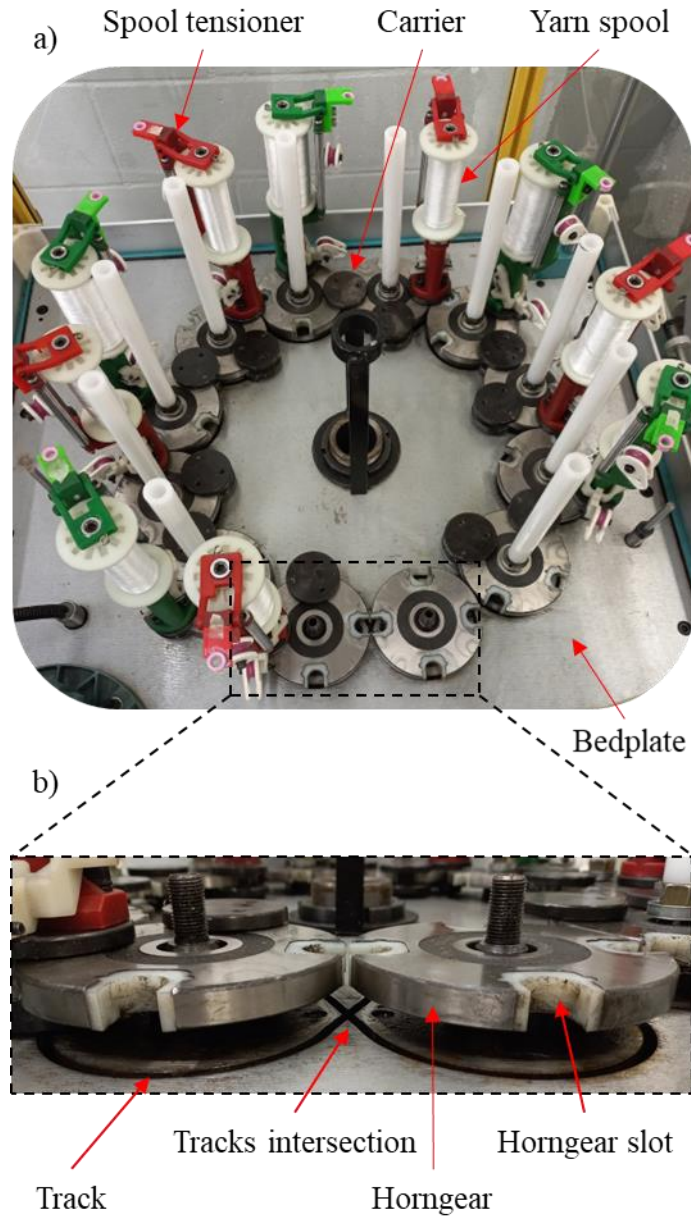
a) Top view of a maypole braiding machine bedplate b) Close-up view of two adjacent honrgears and a track intersection.
